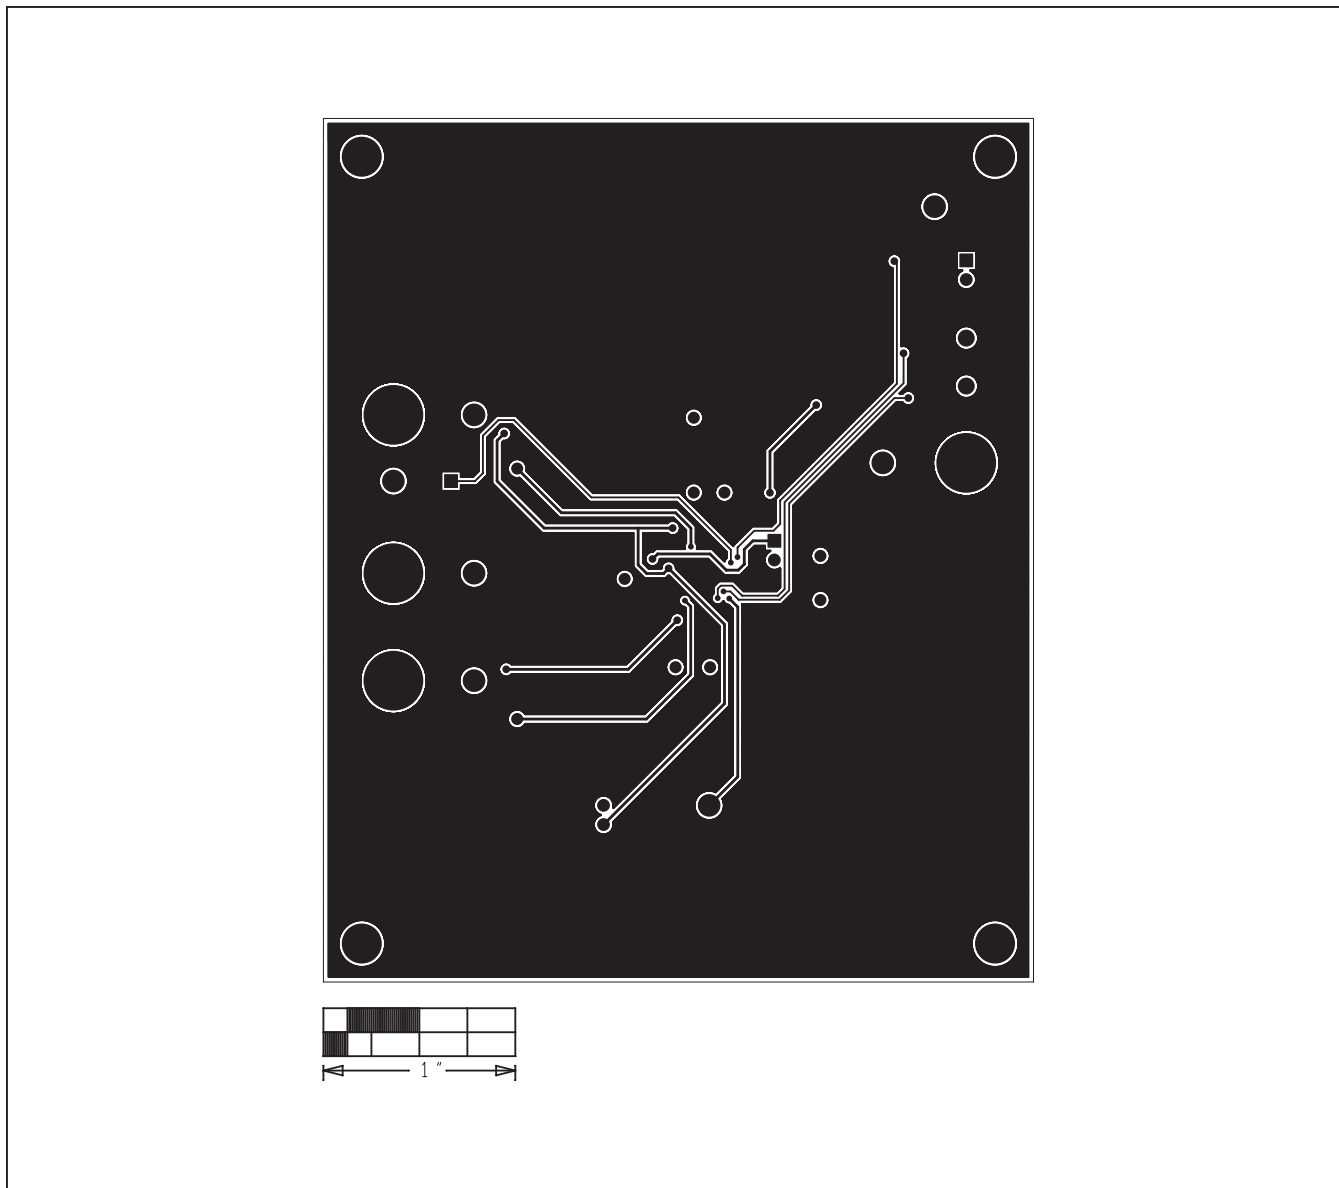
MAX15068 EV Kit PCB Layout—Signal/GND Layer 3
